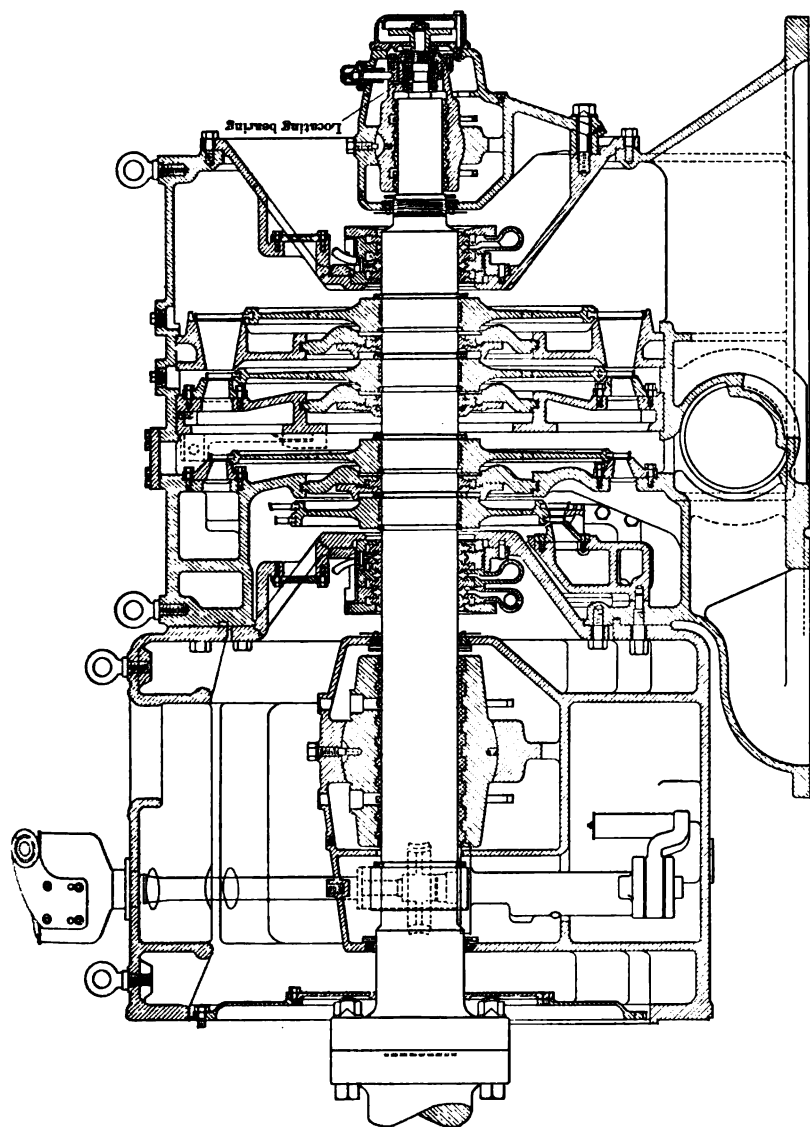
5,000-H.P. RIGID-FRAME STEAM TURBINE.
